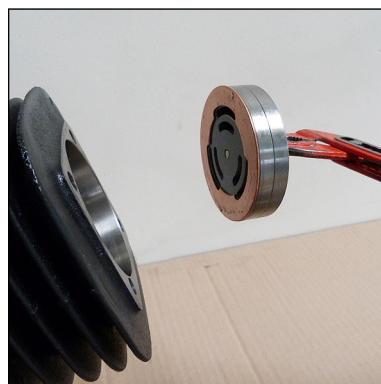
Place new inlet and outlet valve straightly into cylinder
